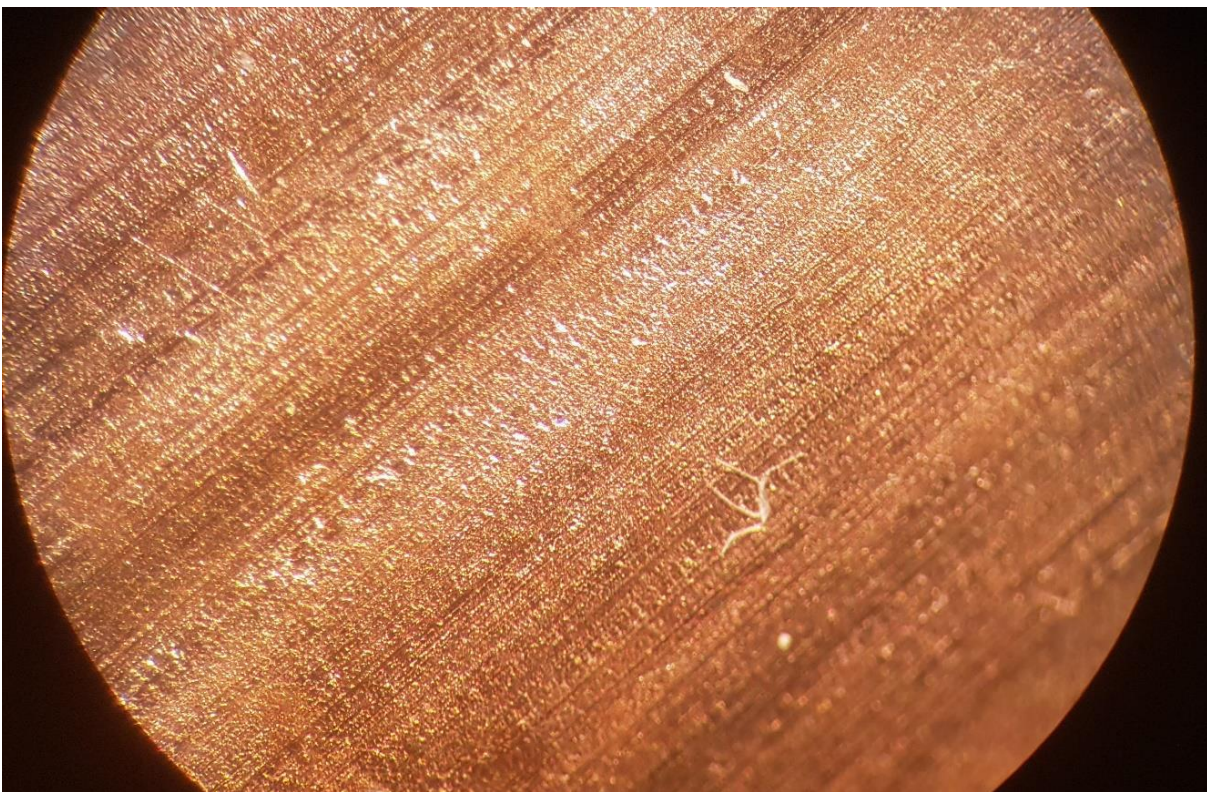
Outer surface of a copper tube that had clear bending ($\times 6,3$)
